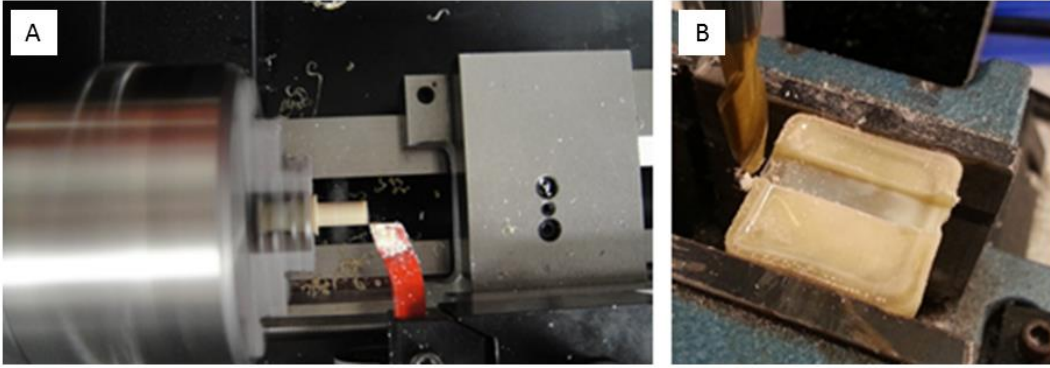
Machining of silk material using a lathe (A) and mill (B).
